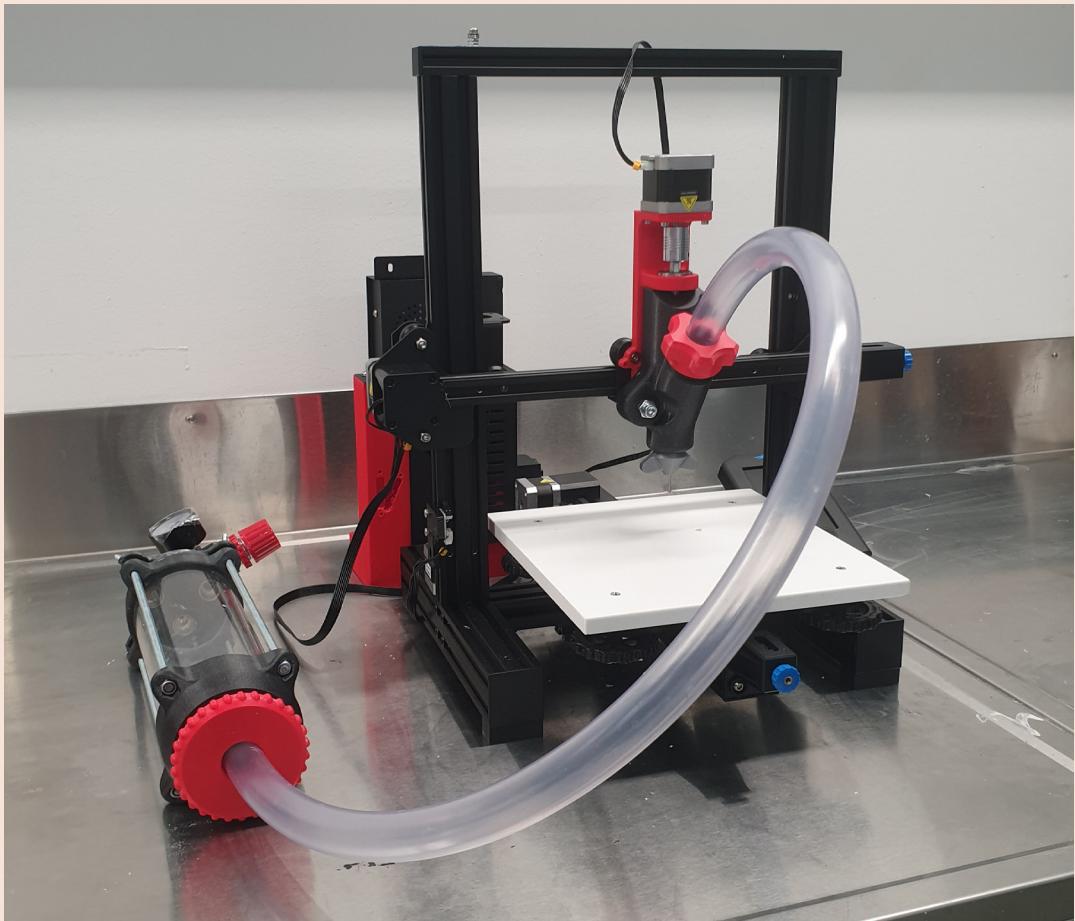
The clay printing components fitted on to the printer. Ready for tests.
